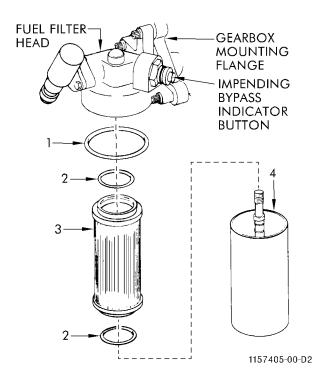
Fuel Filter Element and Bowl; Removal and Installation
